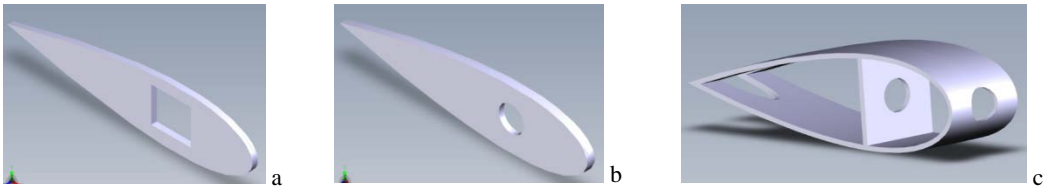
a) Exterior reinforcement profile; b) Interior reinforcement profile; c) Center reinforcement
